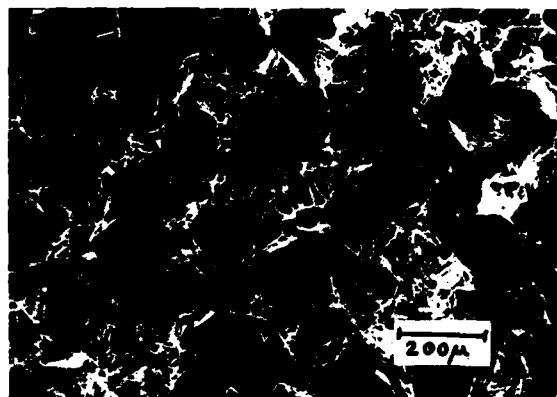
Fracture surface of boron/Al composite.
